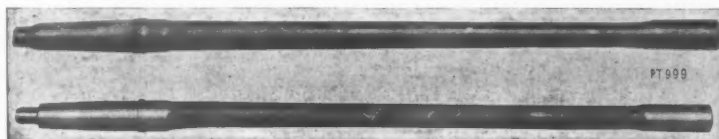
Above, a rough axle shaft forging as it comes to the Sundstrand Model 10 Automatic Stub Lathe. Below it, a similar part after turning both ends simultaneously.
